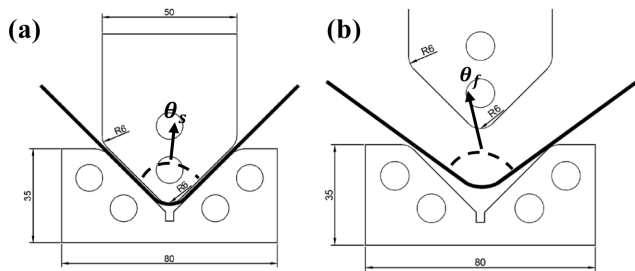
Deformation workpiece (a) without springback and (b) with springback in V-bending
